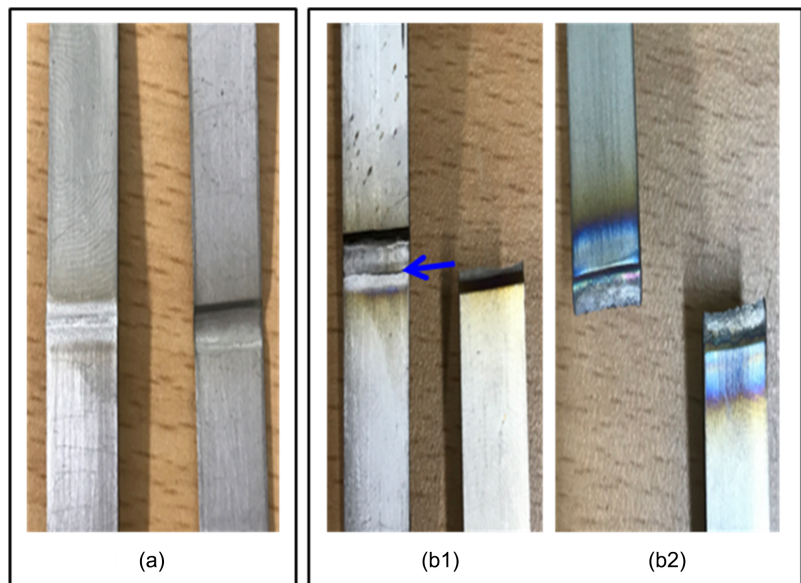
(a) Shear fracture; (b1) and (b2) tensile fracture
